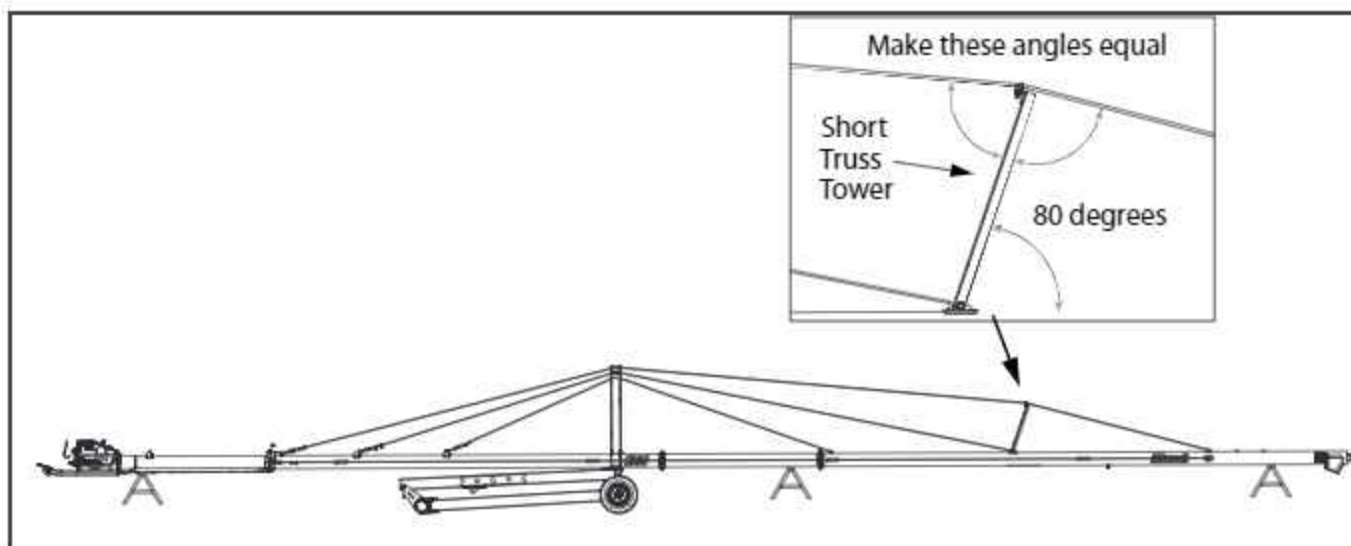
Adjusting the 1080 Short Truss Tower
